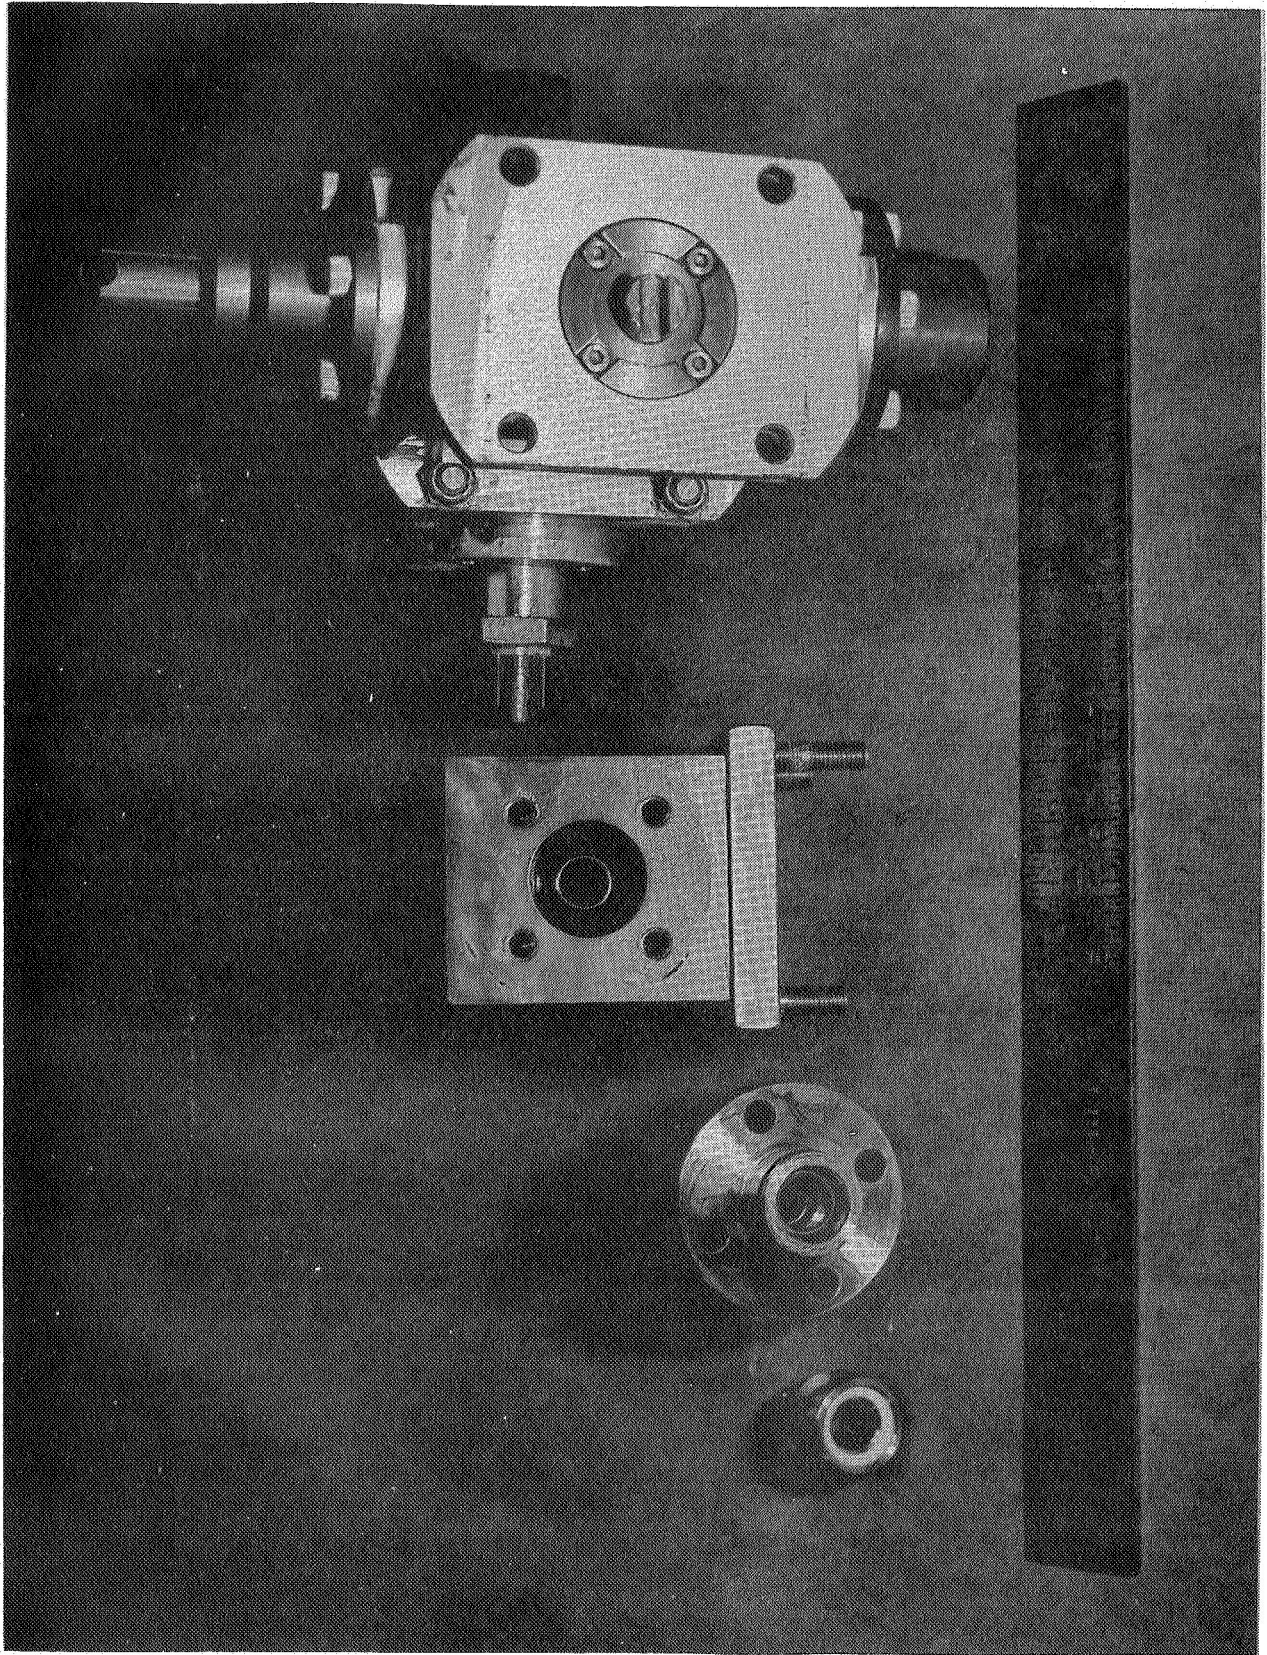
Specimen Disassembled For Shaft Travel Versus Ball Rotation Test
